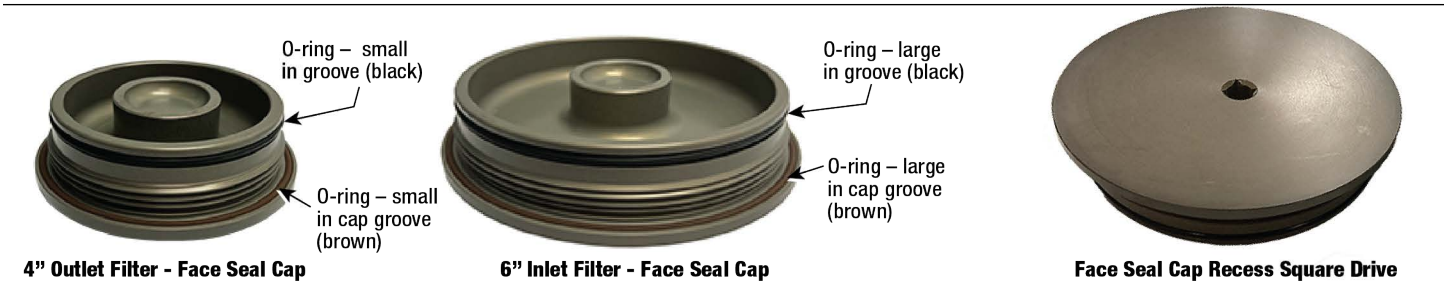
O-Ring Locations for Face Seal Cap w/Recessed Square Drive
